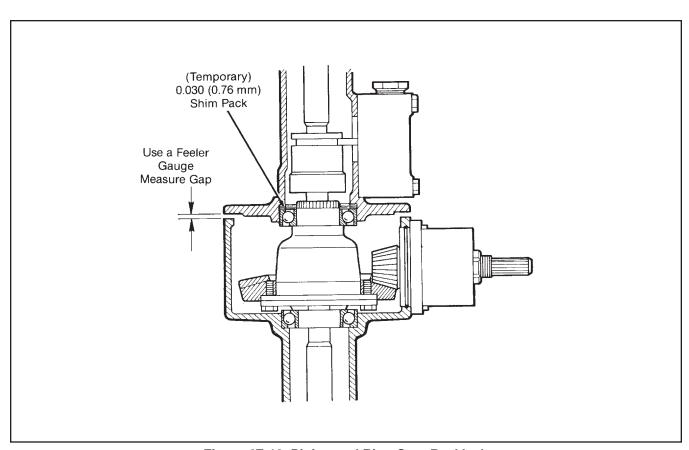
E-13. Pinion and Ring Gear Backlash Adjustment (Optional Method)
